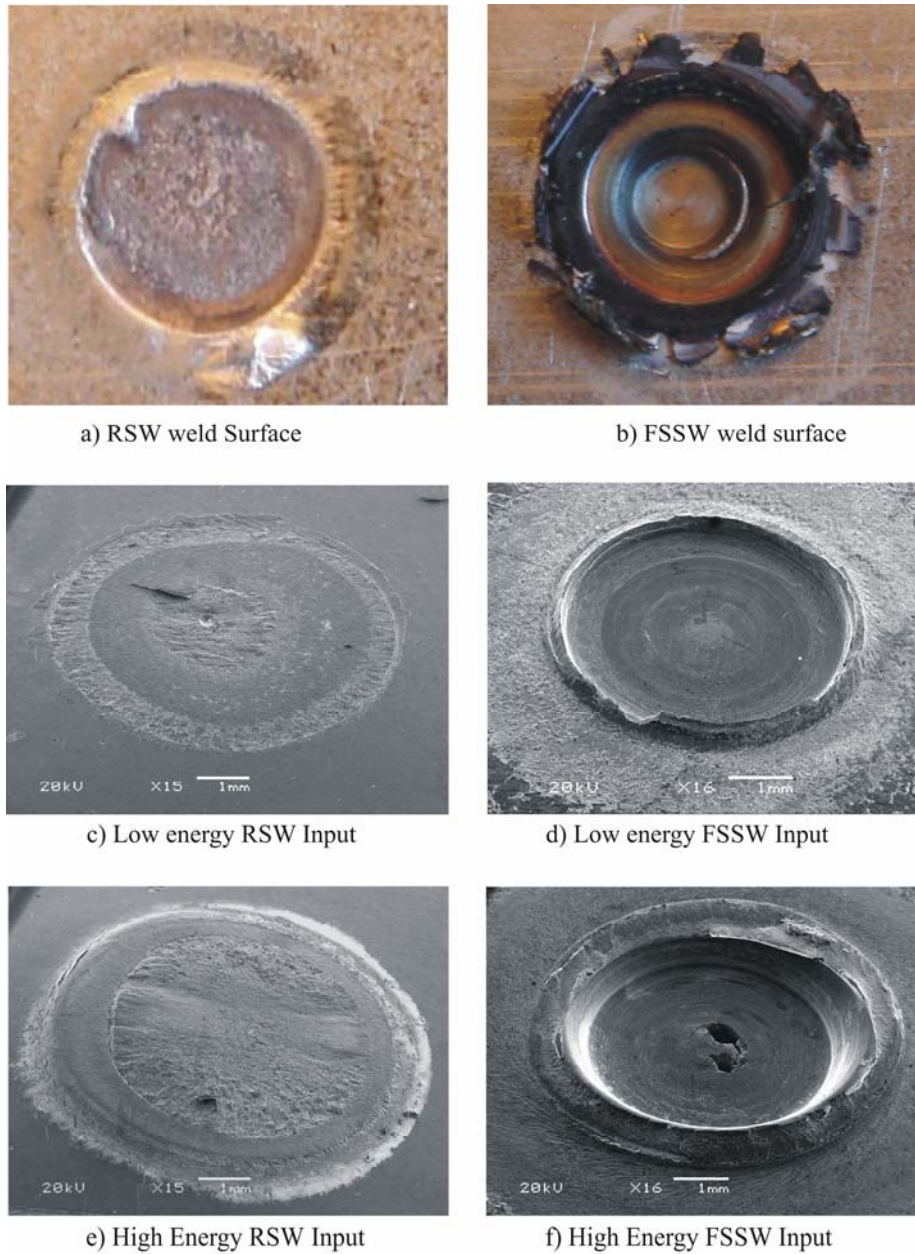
Weld and fracture surface for RSW and FSSW welds
